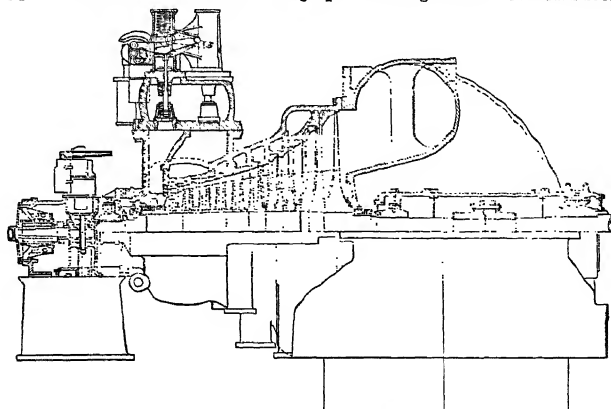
80,000-kw., 1800-r.p.m., Single-cylinder Turbine (General Electric)
